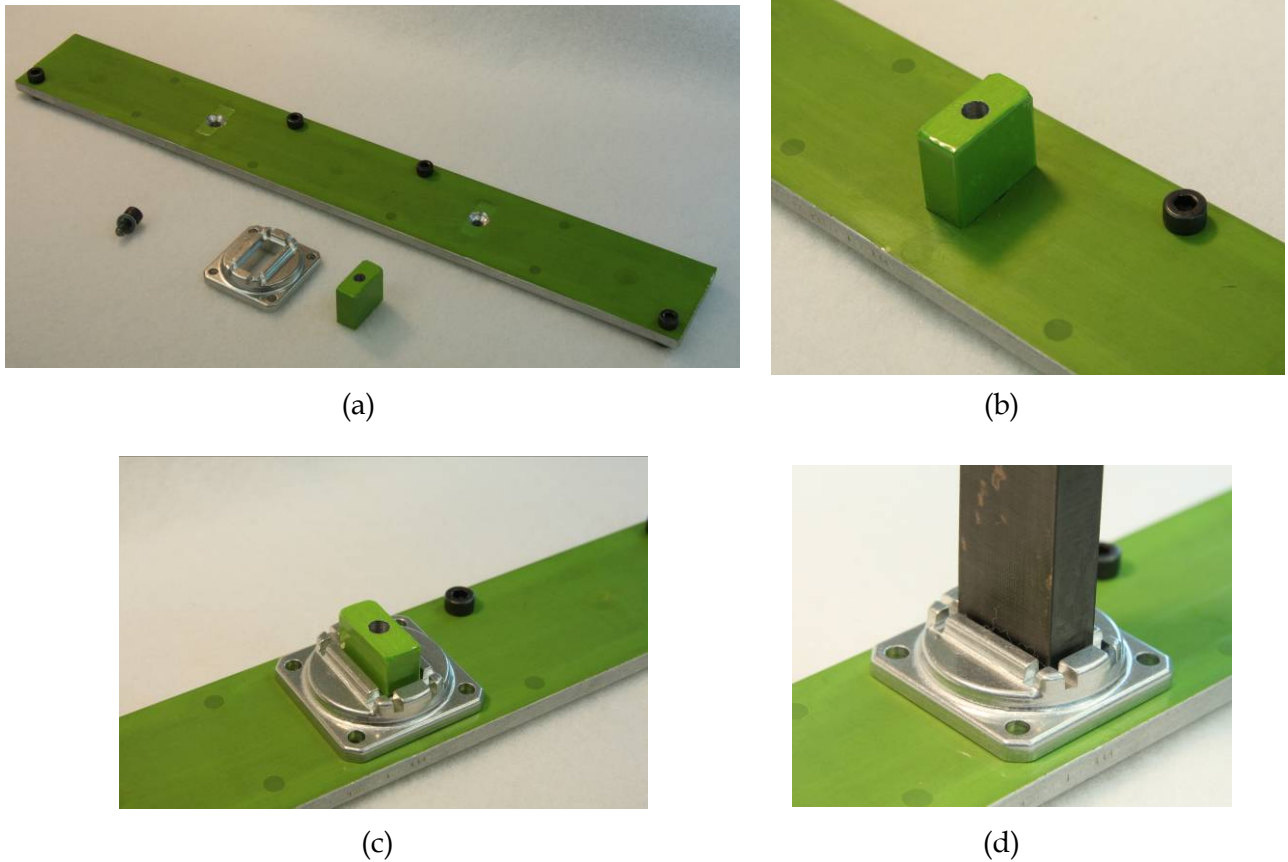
Photographs showing the setup for bonding flanges to CFRP waveguides, (a) the tooling, (b) an aligning block covered with flash-break tape and fastened to the baseplate, (c) flange located on aligning block, and (d) waveguide located over the flange.
